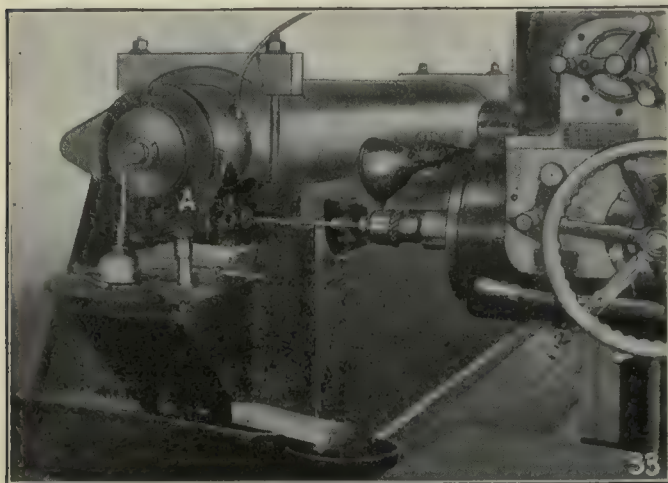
DRILLING AND BORING FOR HINGE-PIN HOLE
